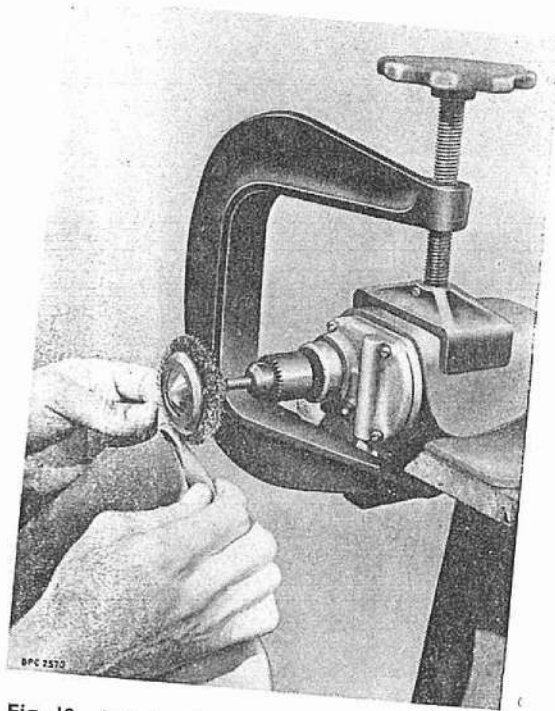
Roughening the bevelled edges using a rotary wire brush
